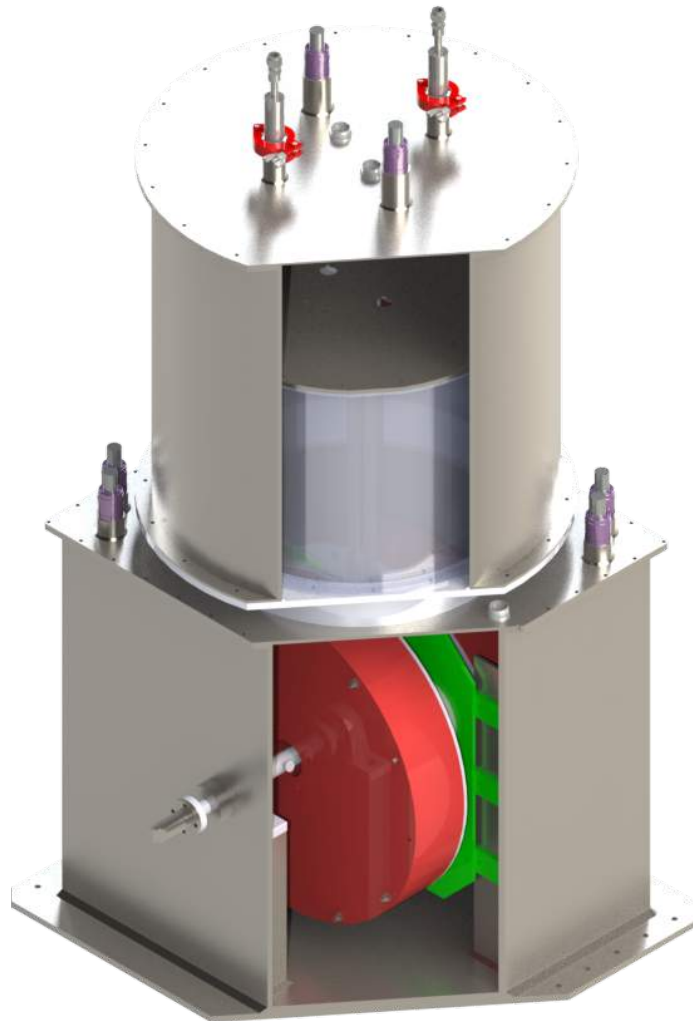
Design option 2. Improved operational design with 1 axis of assembly. Vacuum insulation introduced to minimise heat leak. The need for removable vacuum seals made this option infeasible.
